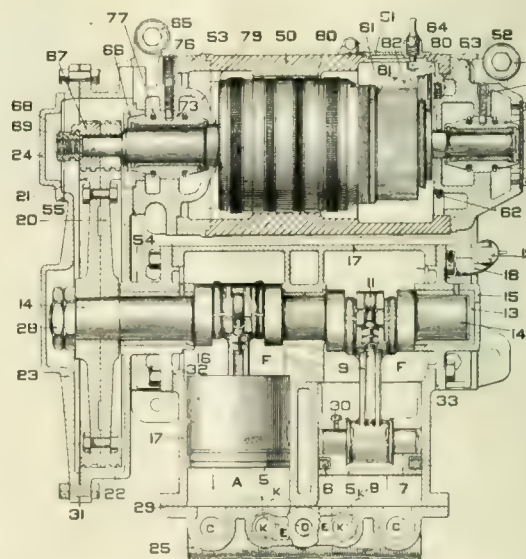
PLAN OF ELECTRIC AIR PUMP.
